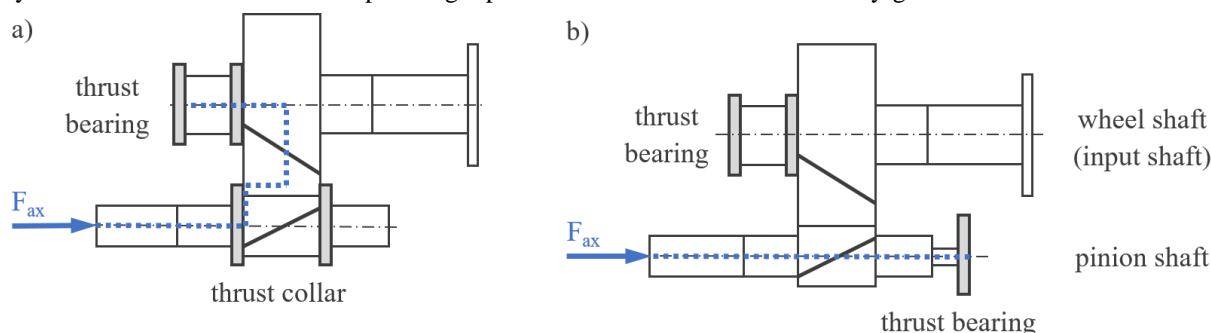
a) thrust collar design and b) conventional thrust bearing design
